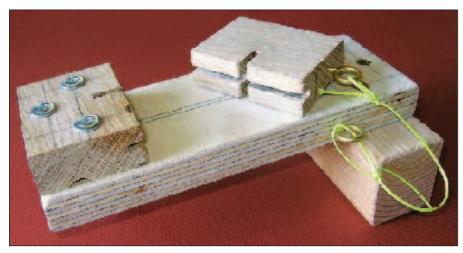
Fixed and free attachment blocks are part of assembly jig. Wires run through horizontal kerfs while spreader goes between vertical kerfs. Wires are set by either squeezing blocks together or tapping the free block with a hammer.
